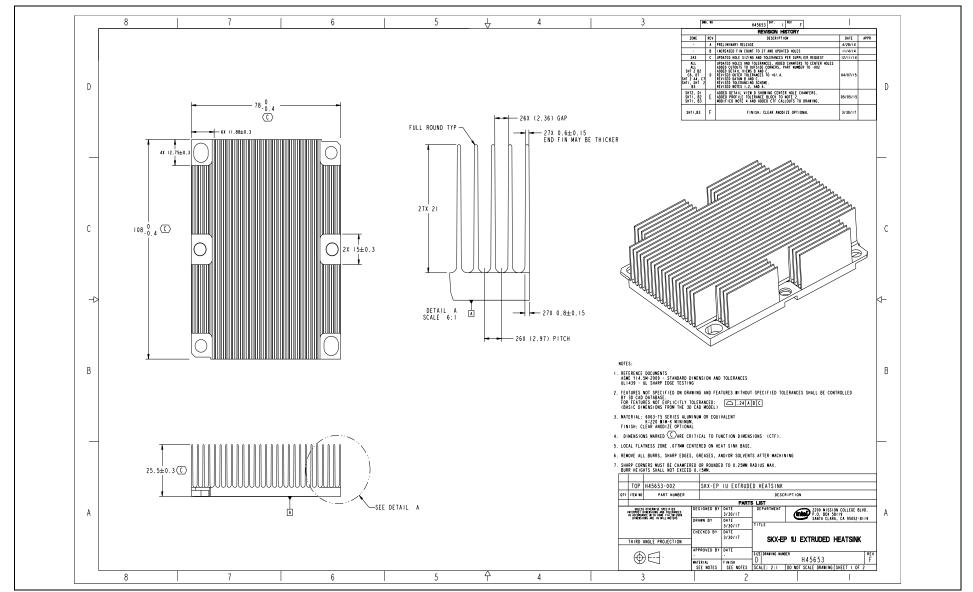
1U Extruded Heatsink (Sheet 2 of 2)
